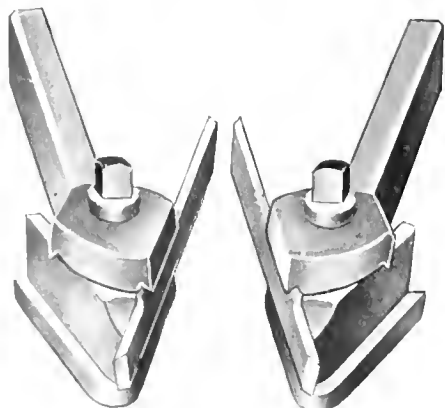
A Side Tool-holder which may be used with either Right or Left-hand Blades
